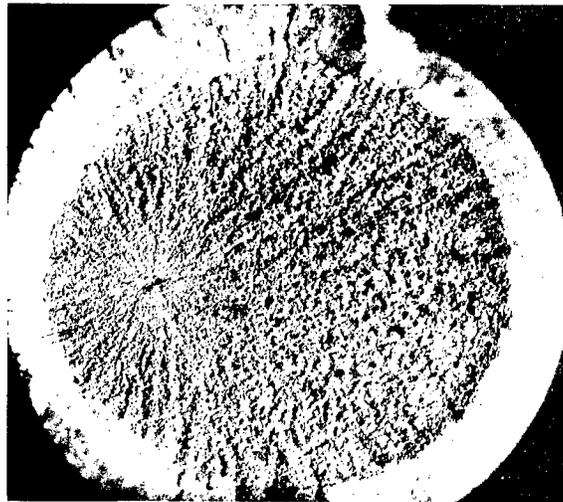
Fracture of SAE 4340 tensile bar, U.T.S. = 320,000 psi (see second example of Table II)
